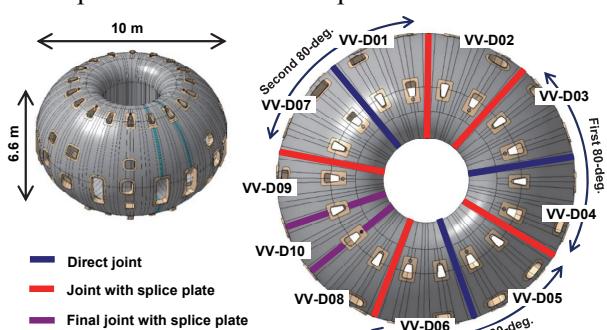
Vacuum vessel (left) & sector assembly (right).
